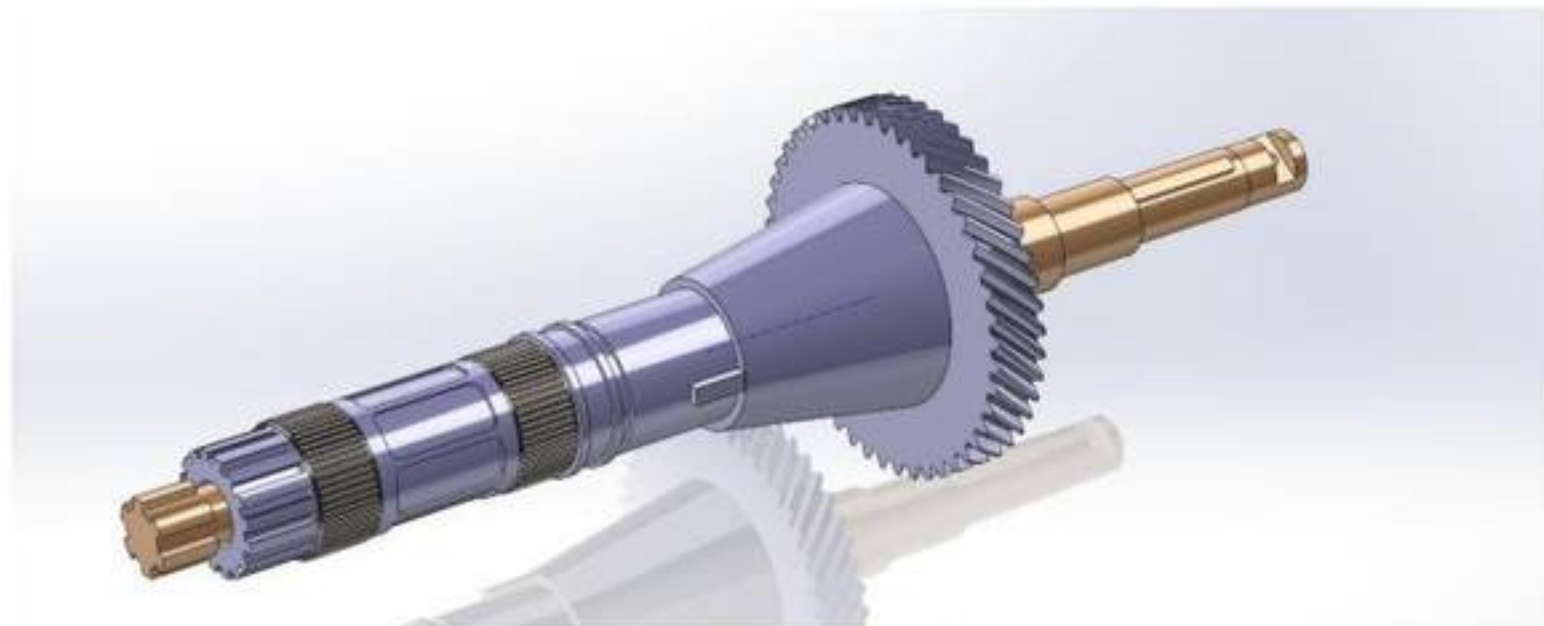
CAD Model of a DCT's Drive Shaft Assembly based on an open-source CAD model [19].
